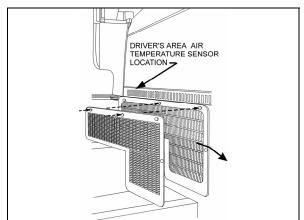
DRIVER'S SECTION ACCESS GRILL 22312
